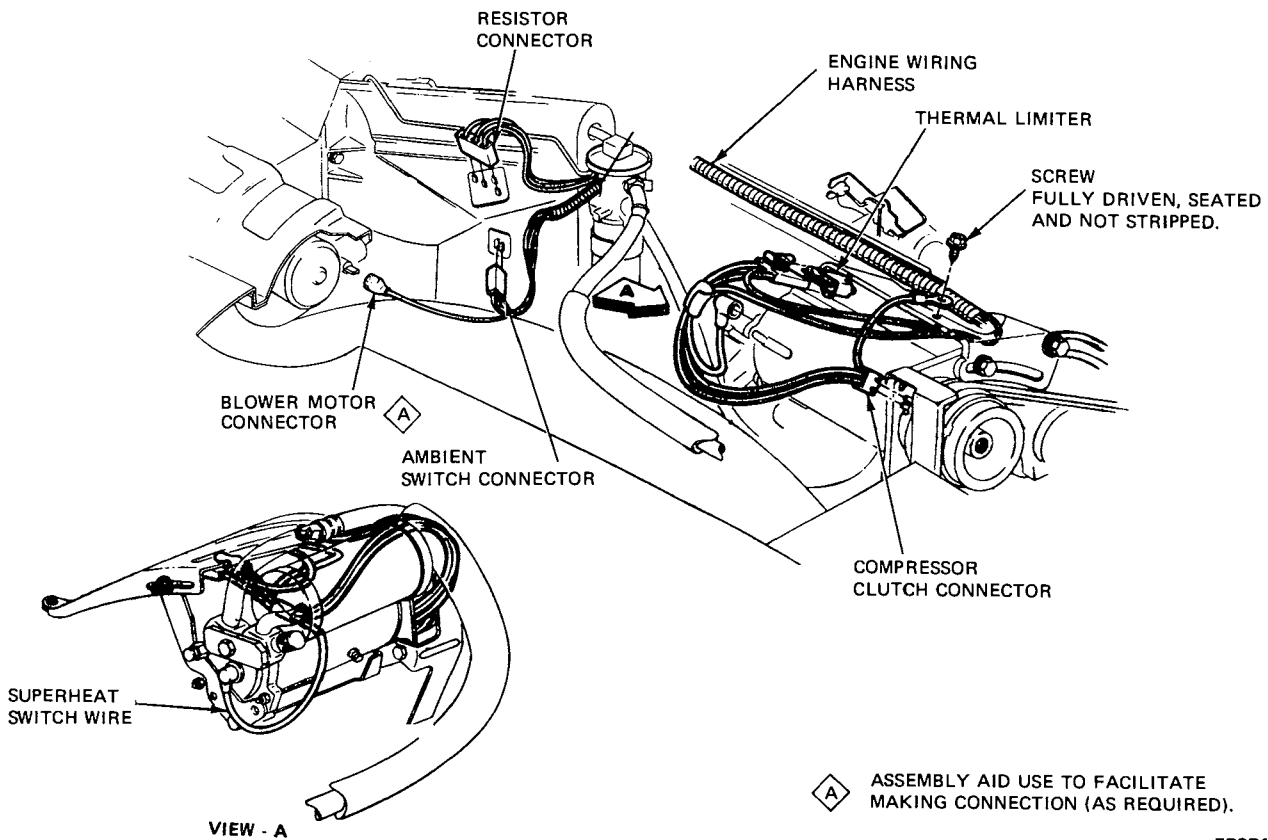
B-246 - Blower Motor Compressor Wiring - A/C Manual - B-C-E Series
